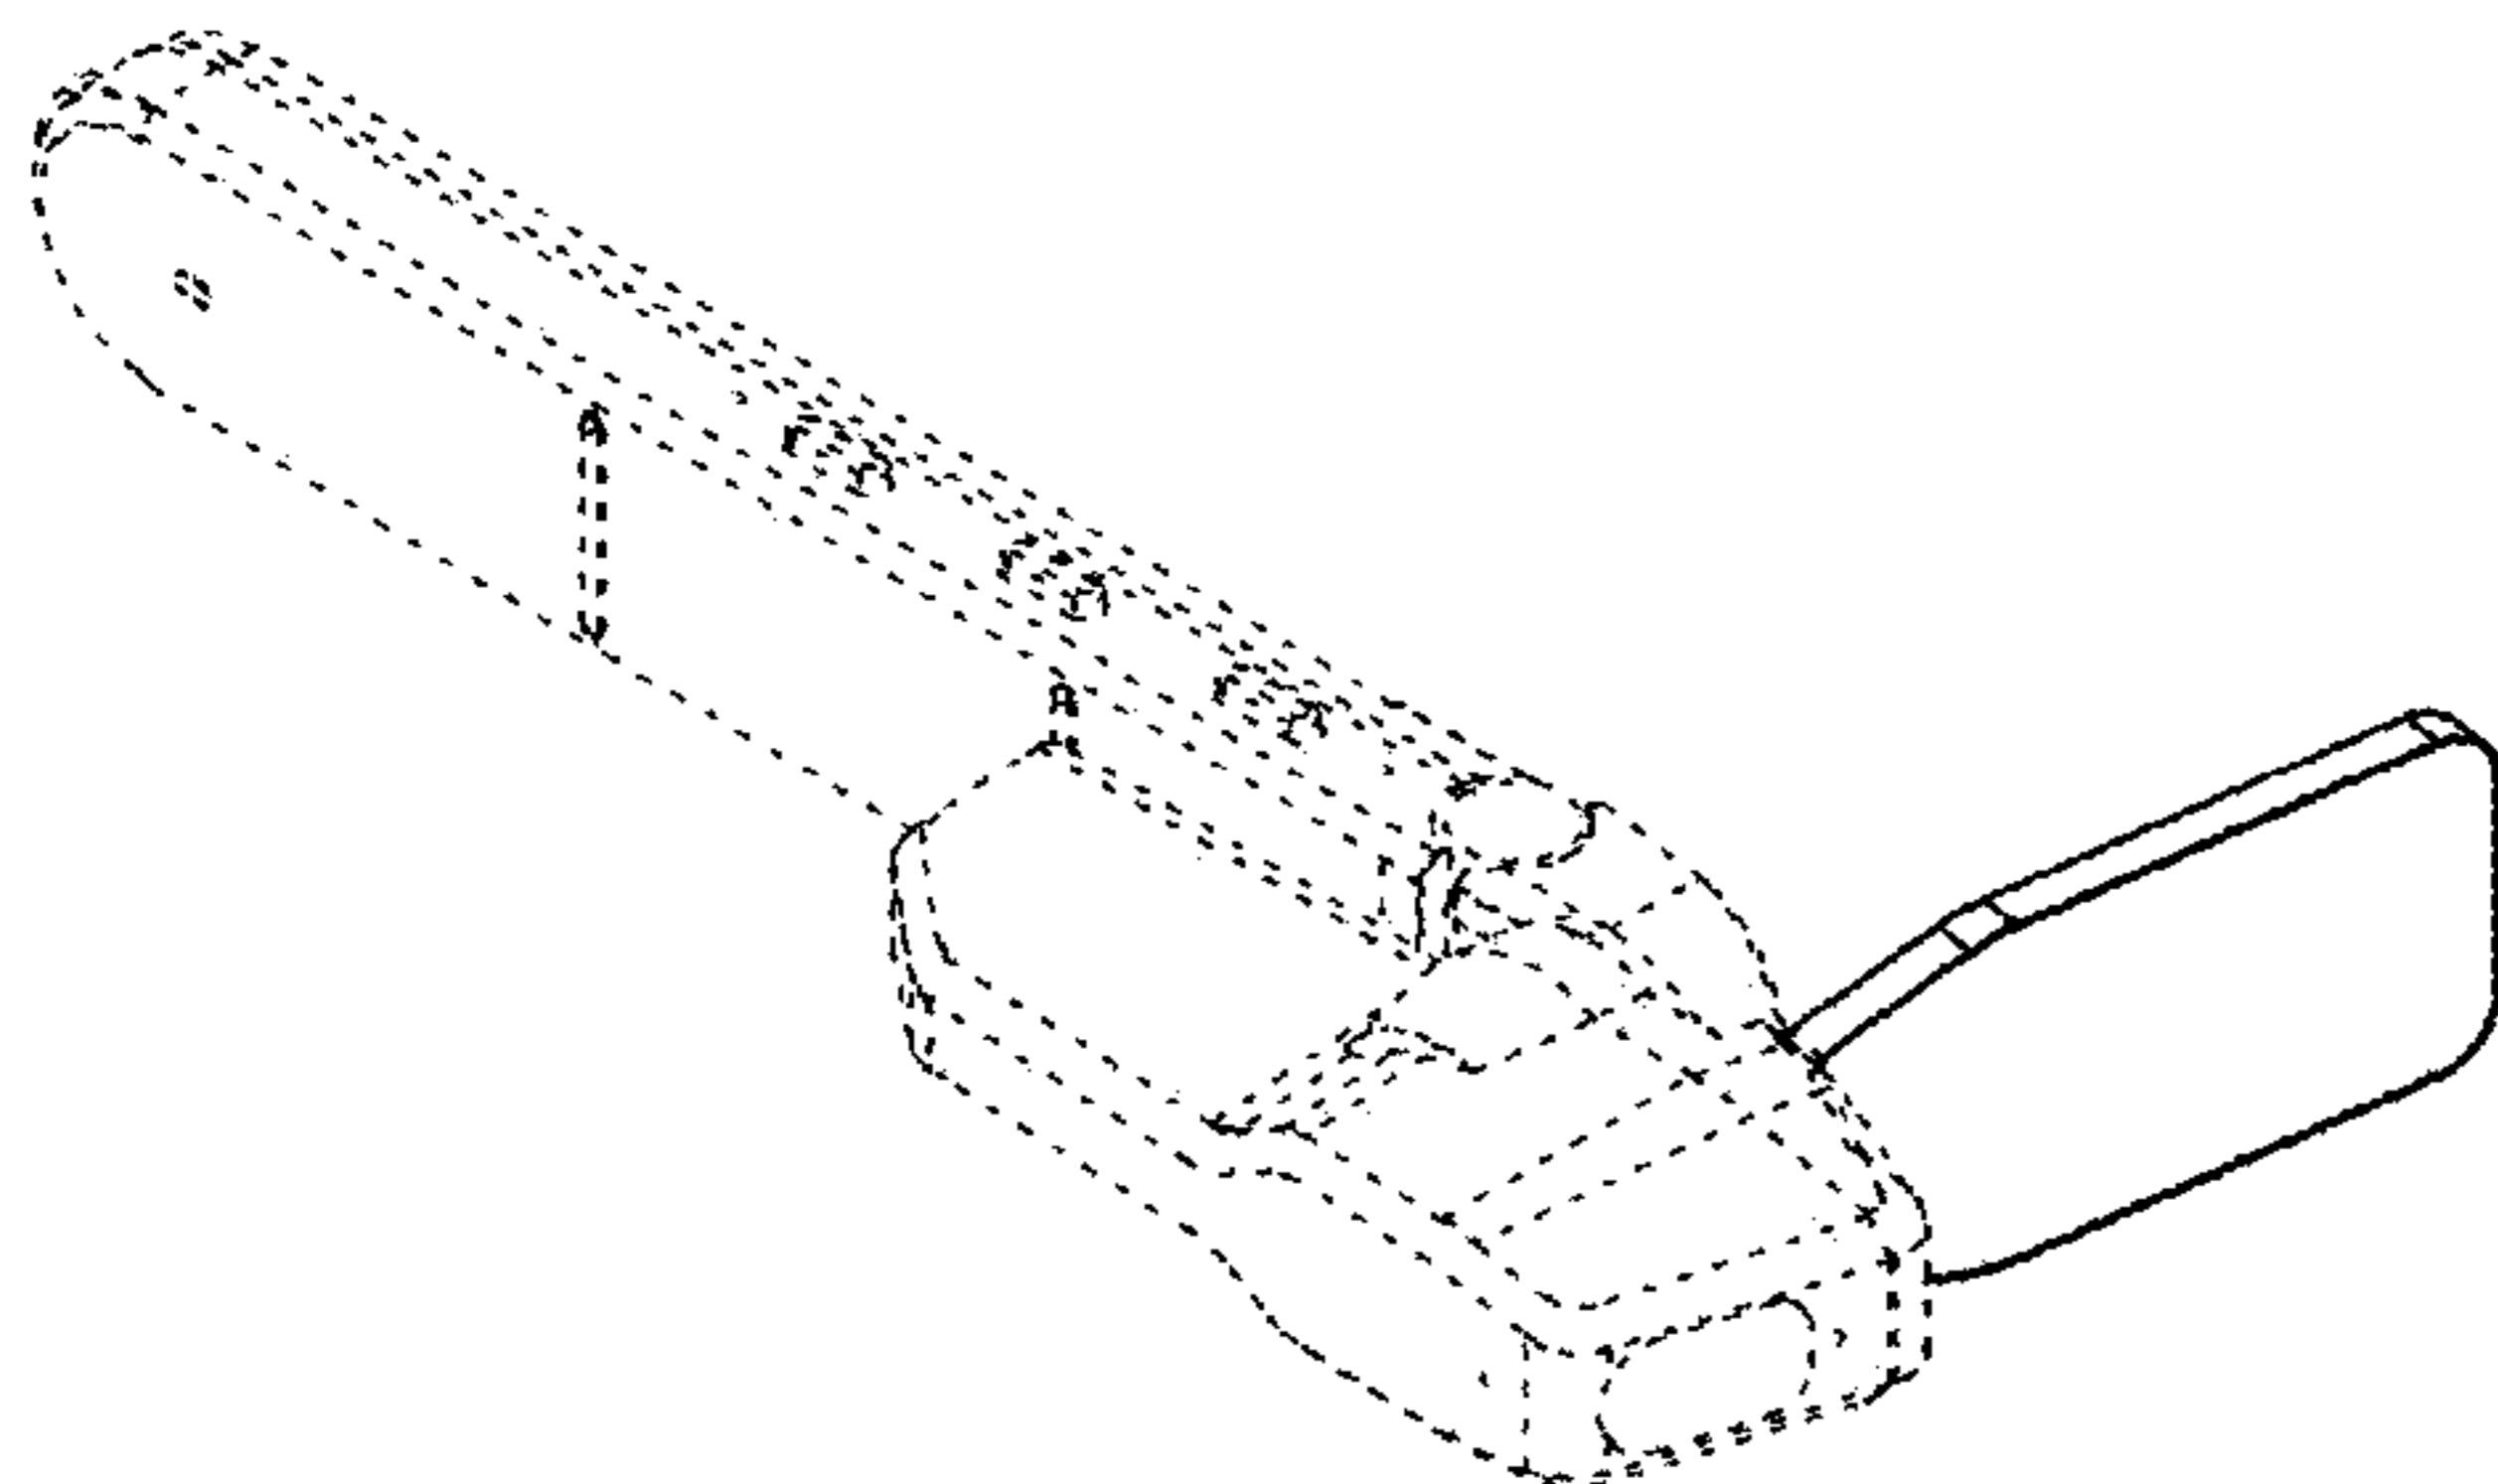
is a bottom, rear, and right side perspective view of FIG. 1;
